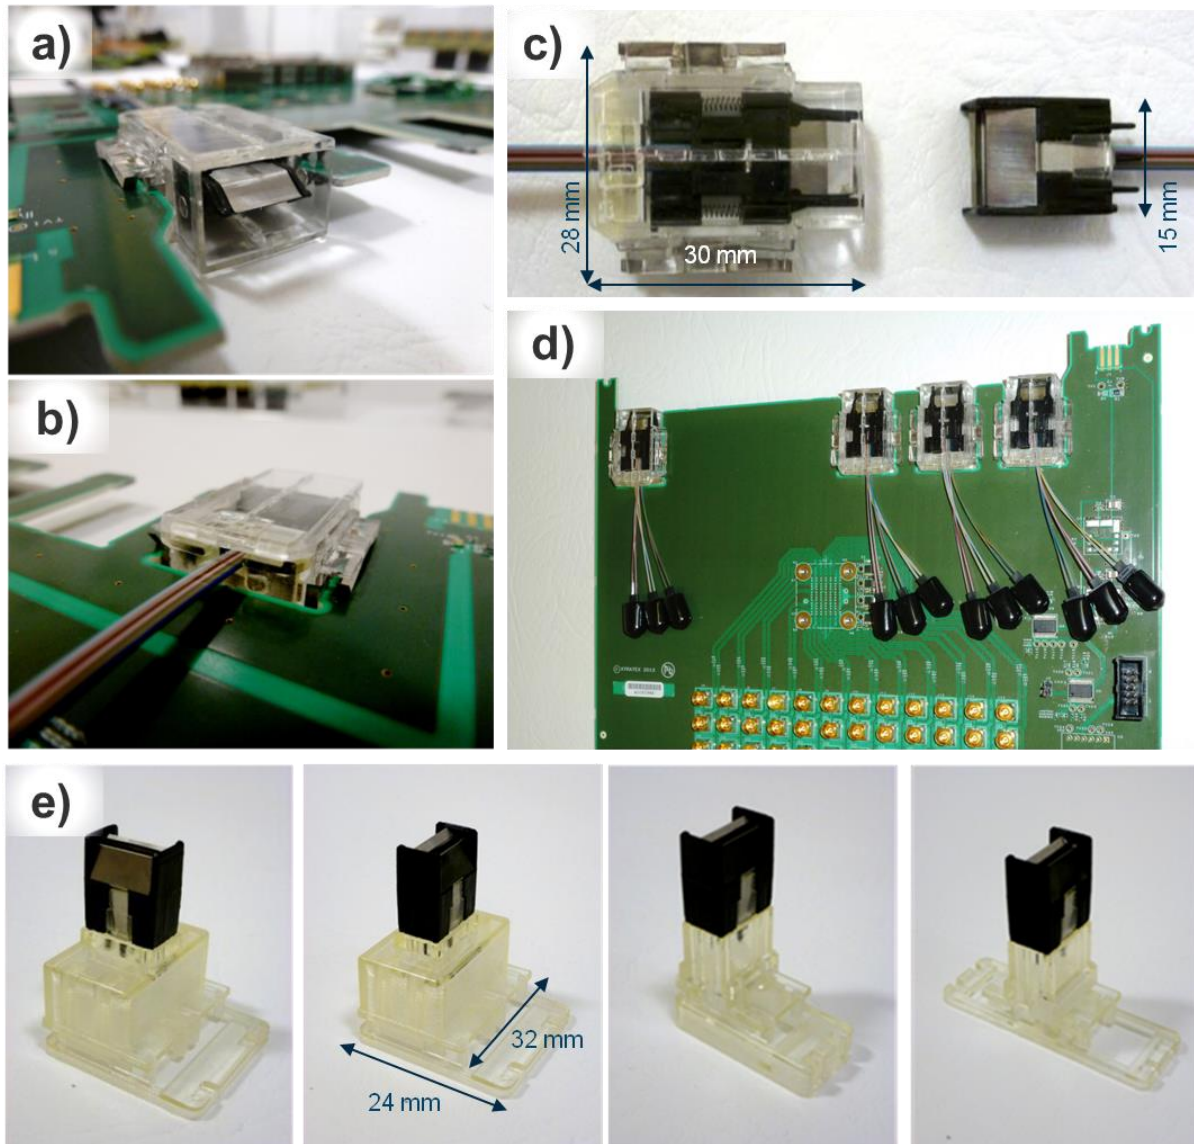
a) Pluggable connector assembled on card edge (front view), b) rear view of pluggable connector showing fibre ribbon from internal MT ferrule, c) pluggable connector and receptacle head, d) connector plugs assembled on edge of test daughtercard, e) 4 variants of full backplane receptacle with receptacle head (black) in different orientations relative to receptacle body (clear)
